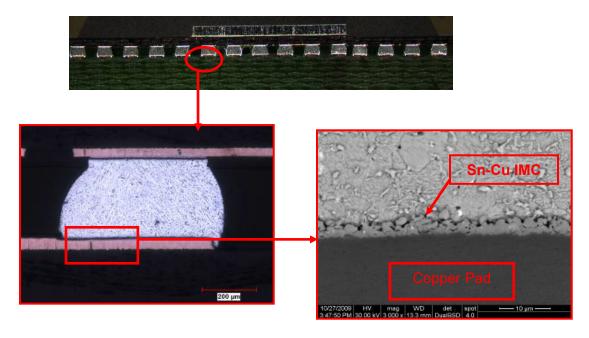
OM-5100 Paste reflowed to BGA having SAC305 solder spheres
